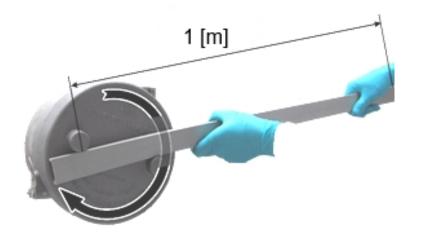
PCB Wire Tie and Valve Housing Cover Installation
